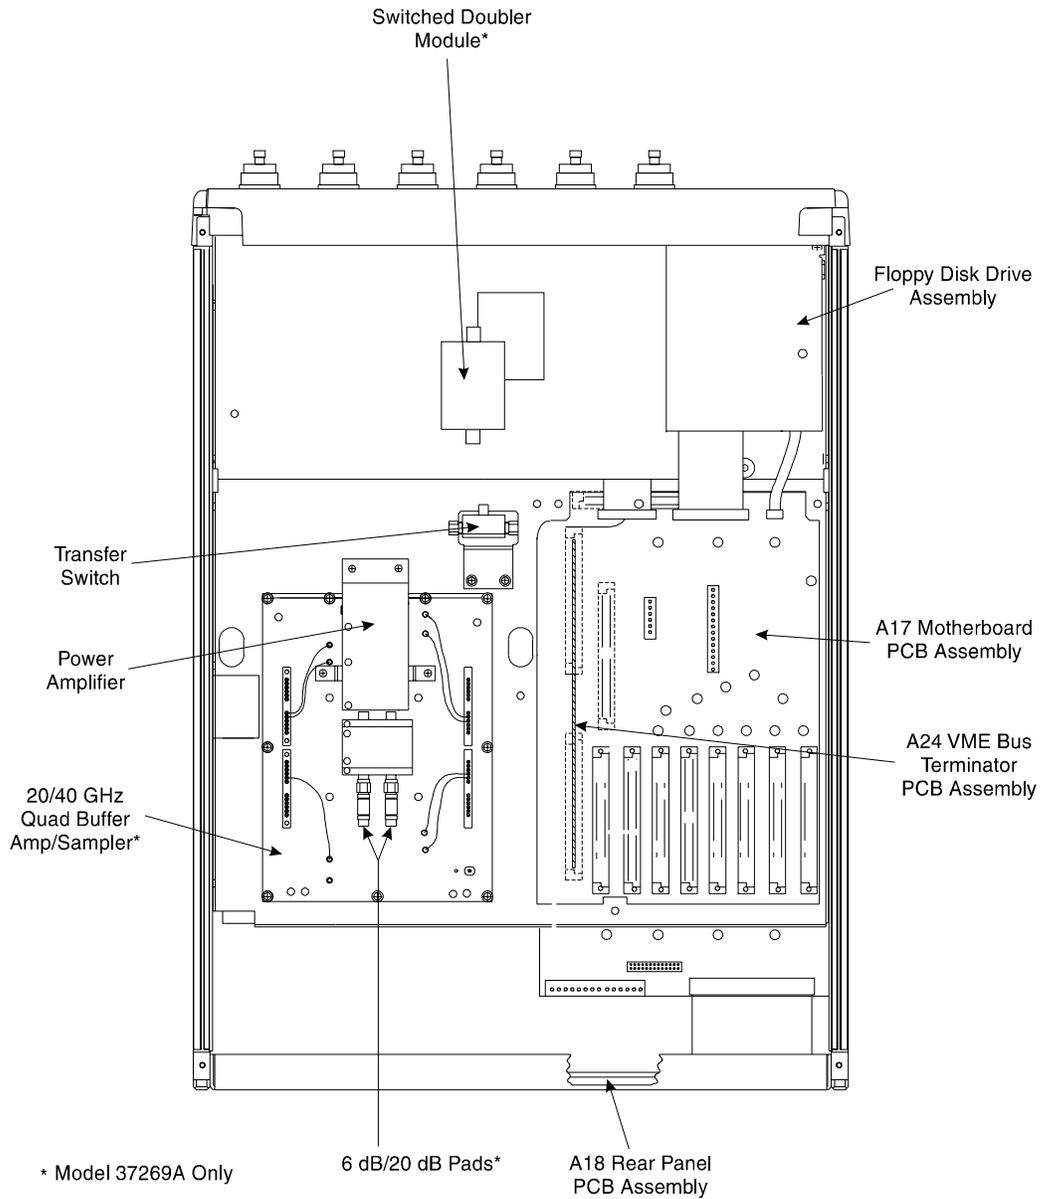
371XXA Major Assemblies Location Diagram (Bottom View)
